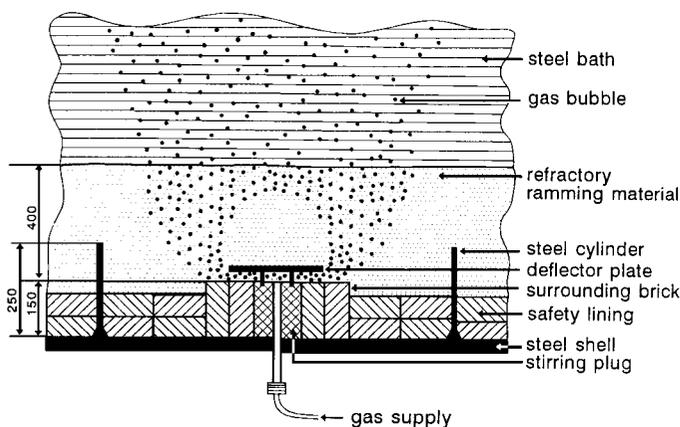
Side view of the furnace, showing the arrangement of the stirring plugs
